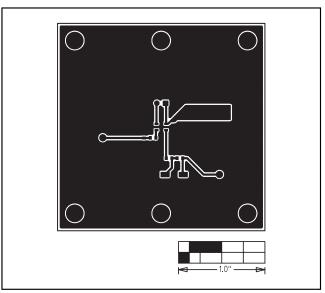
MAX9586 EV Kit PCB Layout—Component Side
